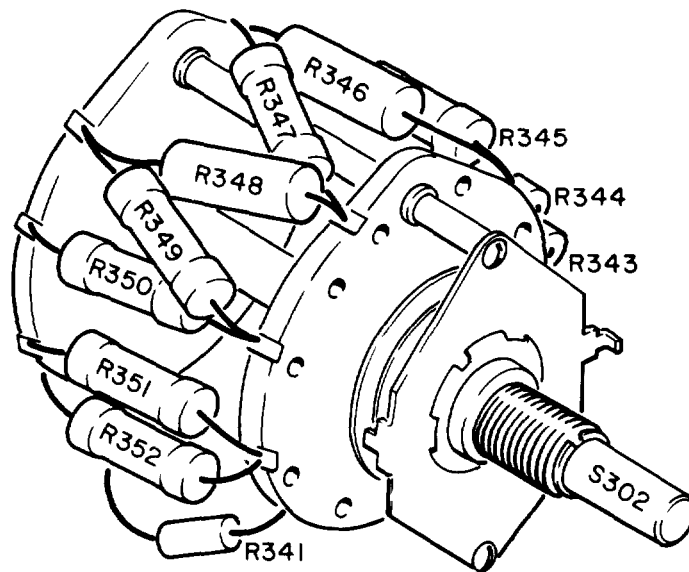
Calibrator Switch Assembly, Location of Parts
